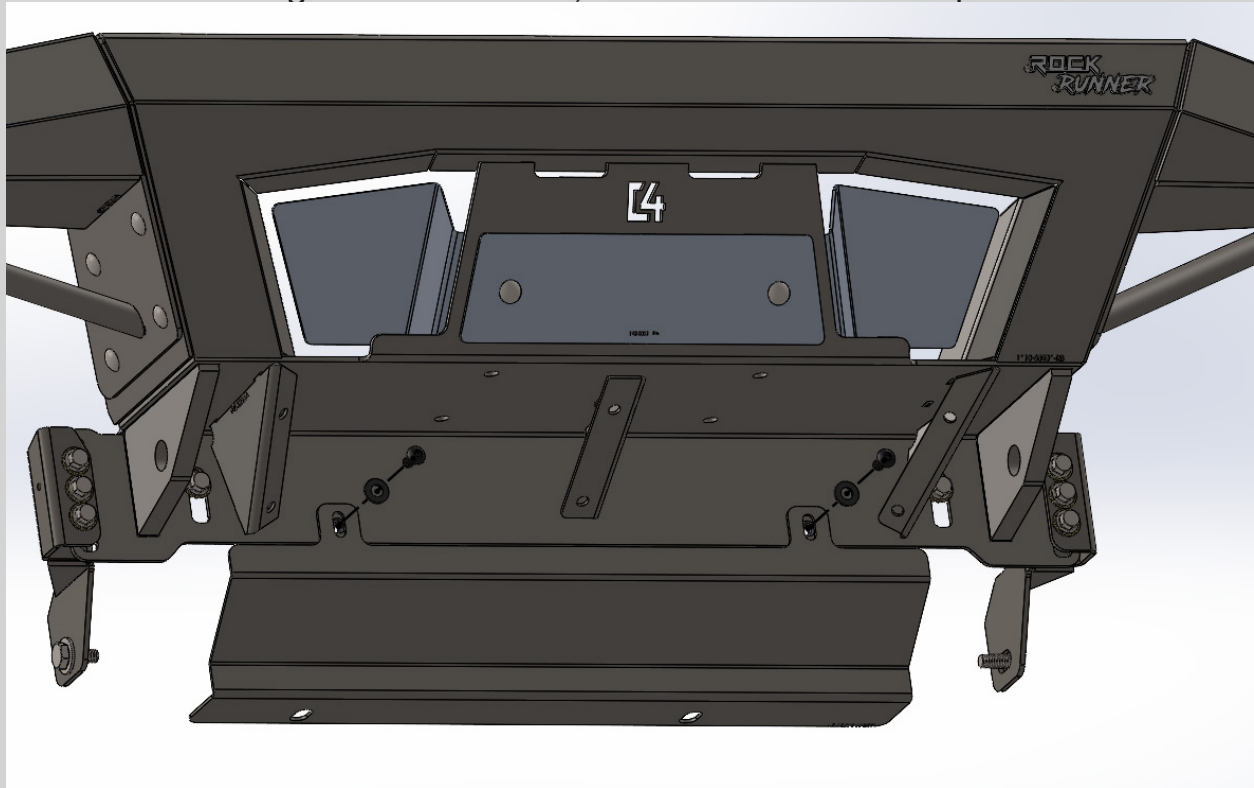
Lower skid fill plate installed using black $\frac{3}{8}$ " hardware.
